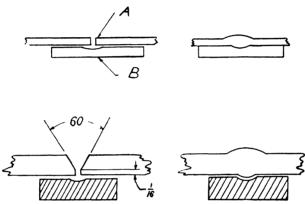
Preparing a cast iron section for welding: A. Base metal, B. Back up material
